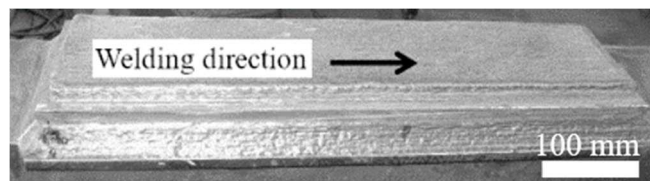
Welded mock-up for 152 alloy during manufacturing.
